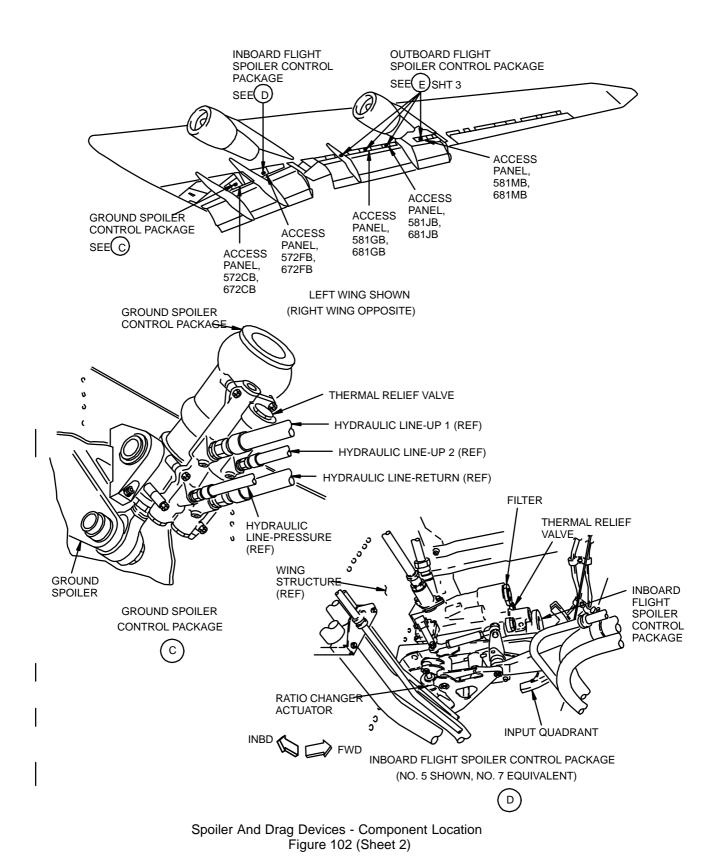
27-60 Spoiler and Drag Devices Comp. Location Fig. 102 (Sheet 2)
